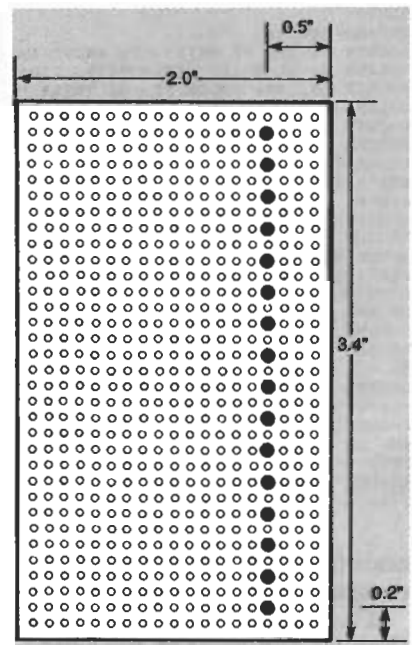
TO MAKE A SWIPE CARD, cut a piece of perboard as shown here.
